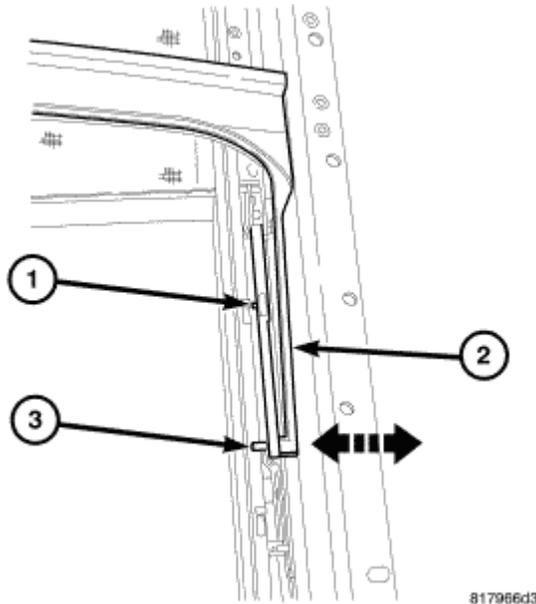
Separating/Installing Trough Pins From Glass Lift Mechanisms
